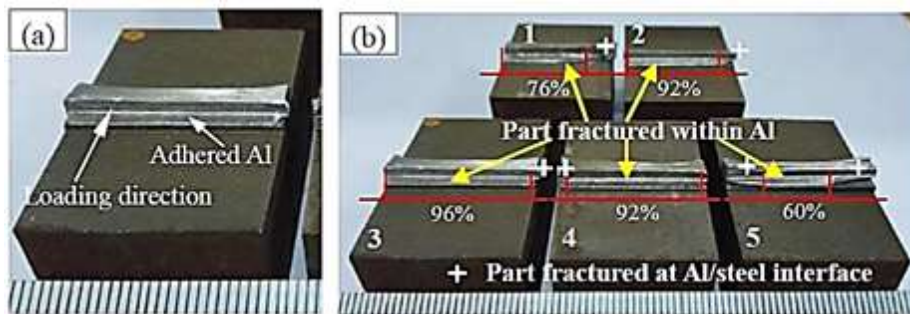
Fracture path of the 1060Al/steel clad joints produced using FSB pass at various transverse speeds after shear test: (a) 235 mm/min, (b) Joints collection: (1) 150 mm/min, (2) 190 mm/min, (3) 235 mm/min, (4) 300 mm/min, and (5) 375 mm/min [30].
